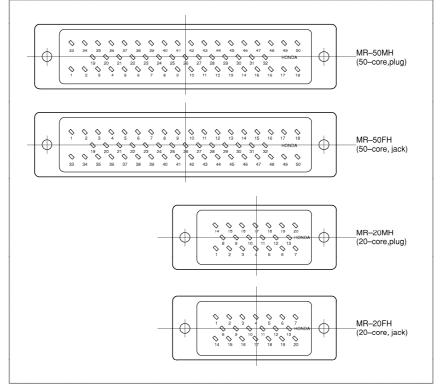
(e) Connector (terminal layout) manufactured by HONDA TSUSHIN KOGYO -426 -
